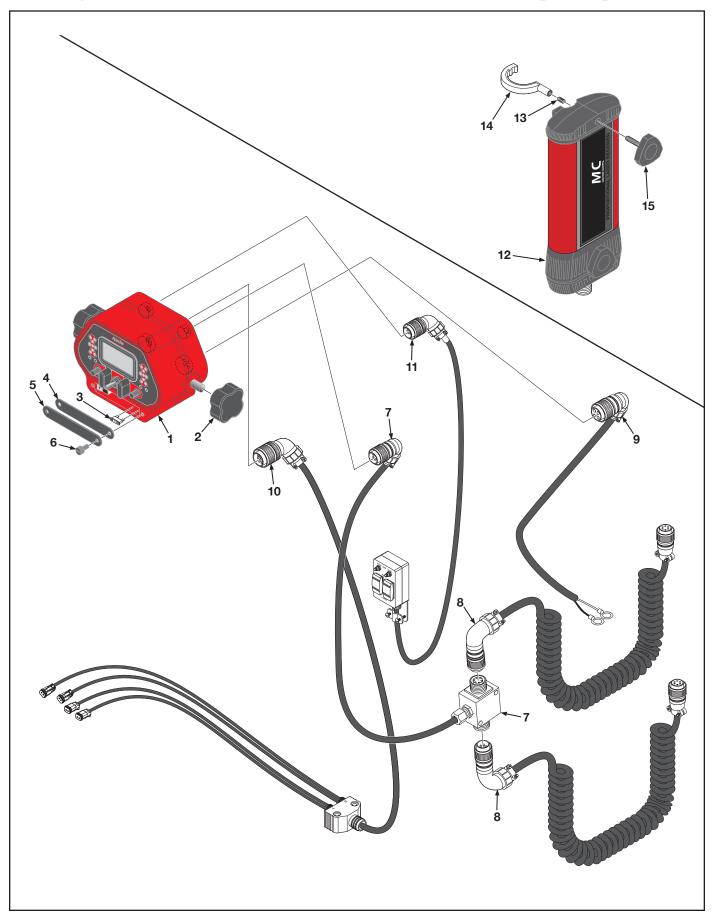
Control Panel, Laser Receiver 360°, Cables - Apache/Spectra
